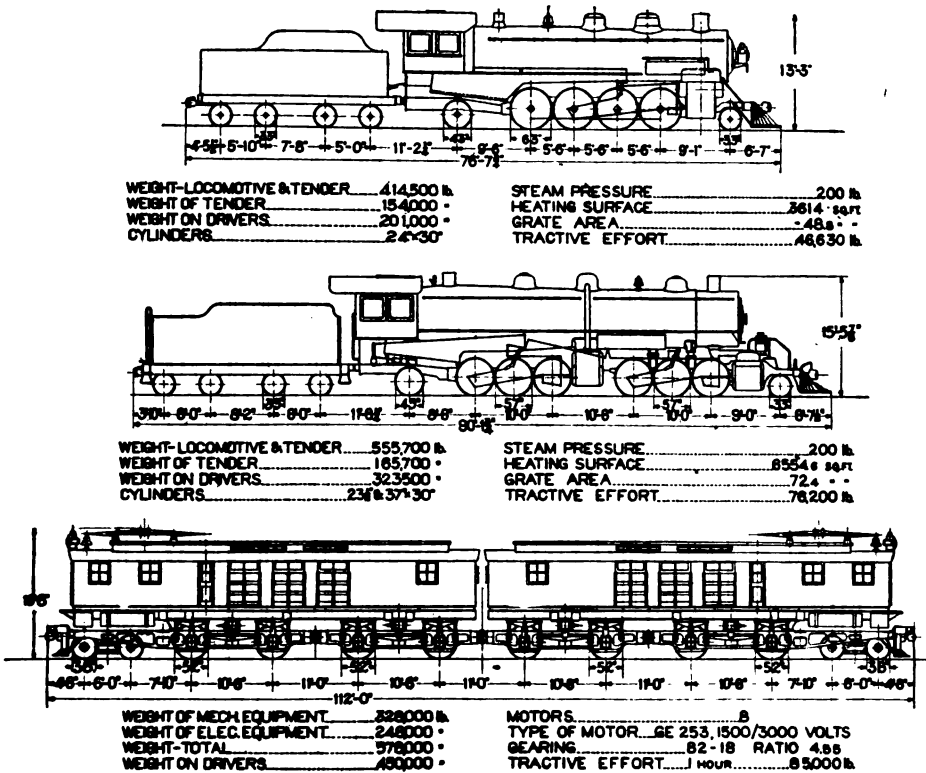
PRINCIPAL TYPES STEAM AND ELECTRIC LOCOMOTIVES, CHICAGO, MILWAUKEE & ST. PAUL RAILWAY.
